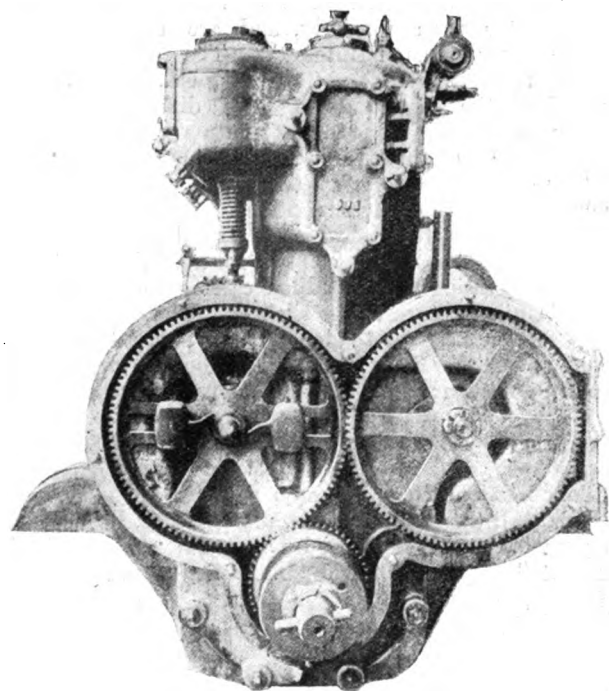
End view of Brasler Motor with Cover enclosing Cam Shaft Driving Pinions Detached.
